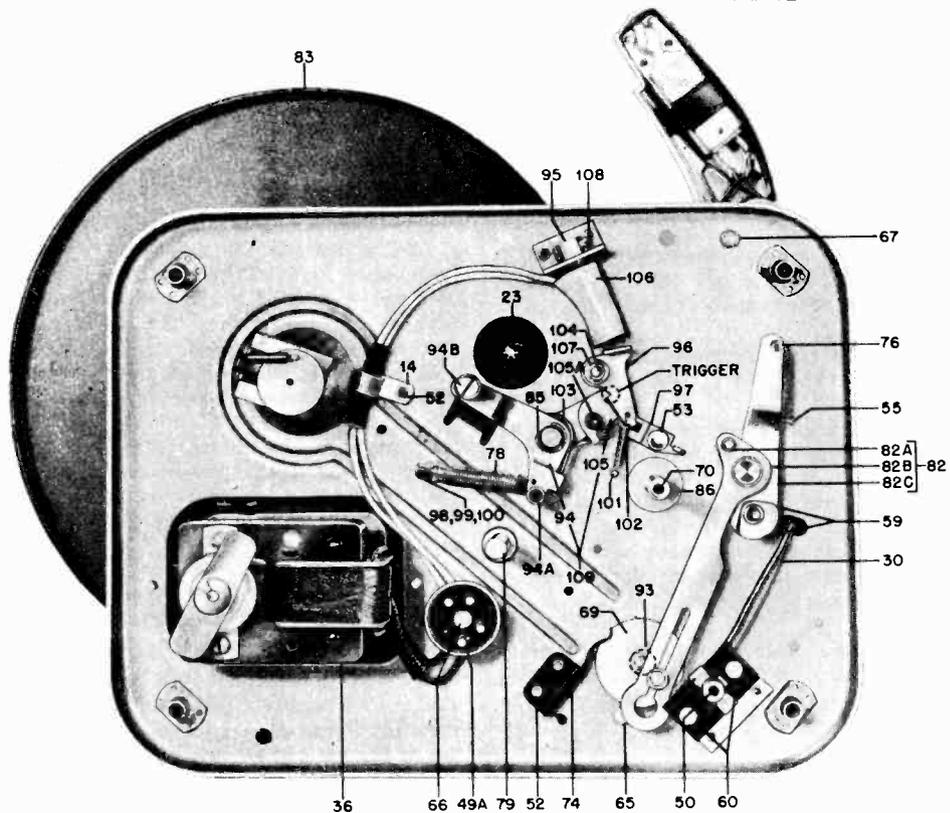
PARTS LOCATION - BOTTOM - PARTLY DISASSEMBLED
